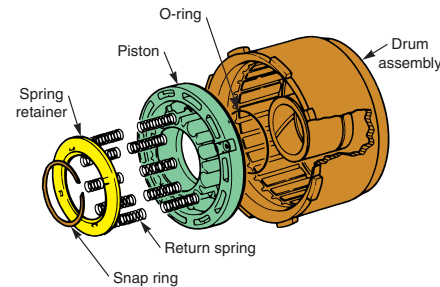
Exploded view of a clutch apply piston and related parts shows parts that must be removed during rebuilding. (Nissan)
